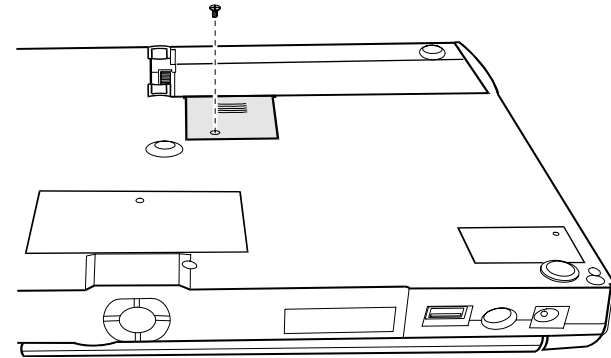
Removing the CD-ROM Drive Connector Cover
